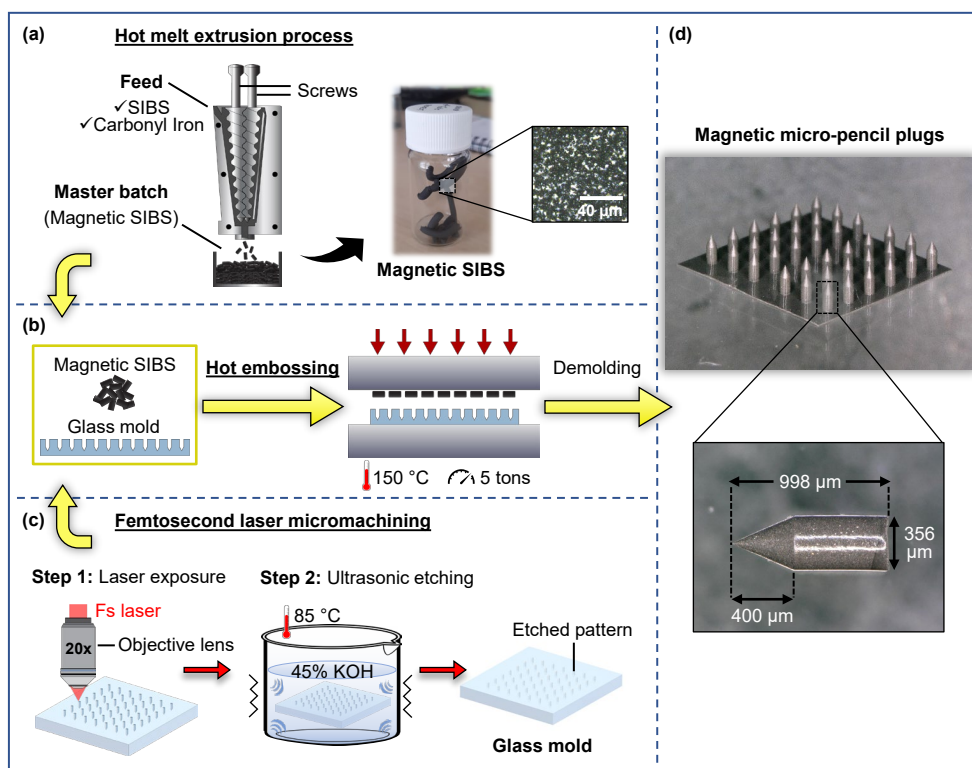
Fabrication process of the magnetic micro-pencil plug and its final shape and dimensions. (a) Illustration of the hot melt extrusion process used to fabricate the magnetic SIBS pellets, which show a relatively uniform dispersion of the magnetic particles in the SIBS matrix, as seen in the microscopy image on the right. (b) Schematic representation of the micro-pencil fabrication by replica molding using hot embossing, with femtosecond laser-machined fused silica glass molds. (c) Schematic illustration of the femtosecond laser machining process used to fabricate the glass molds. (d) Demolded array of magnetic micro-pencils and shape and dimensions of the micro-pencil plug.
